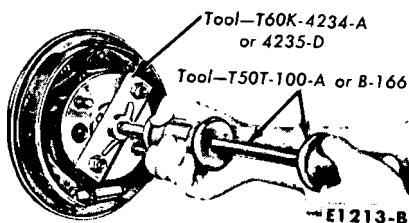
Removing Axle Shaft—Integral Carrier Type Axle
